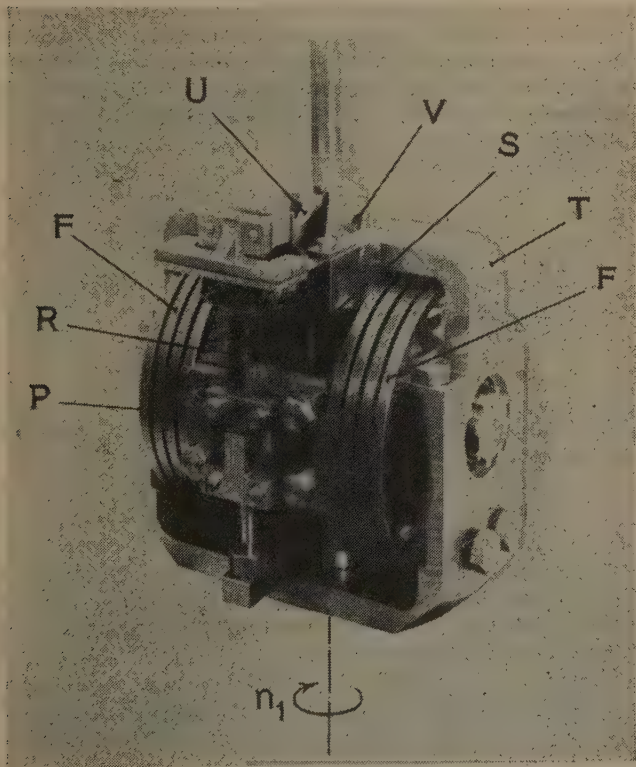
ASSEMBLED GYRO SPEED DETECTOR WITH VISIBLE ADJUSTING MECHANISM
